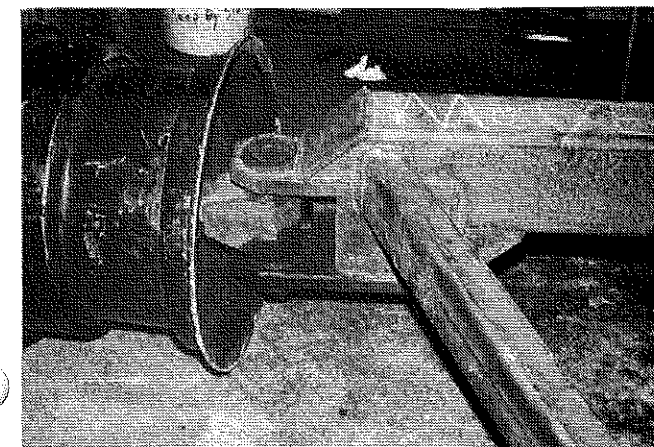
Close-Up view of the spindle assembly constructed from readily available materials.
